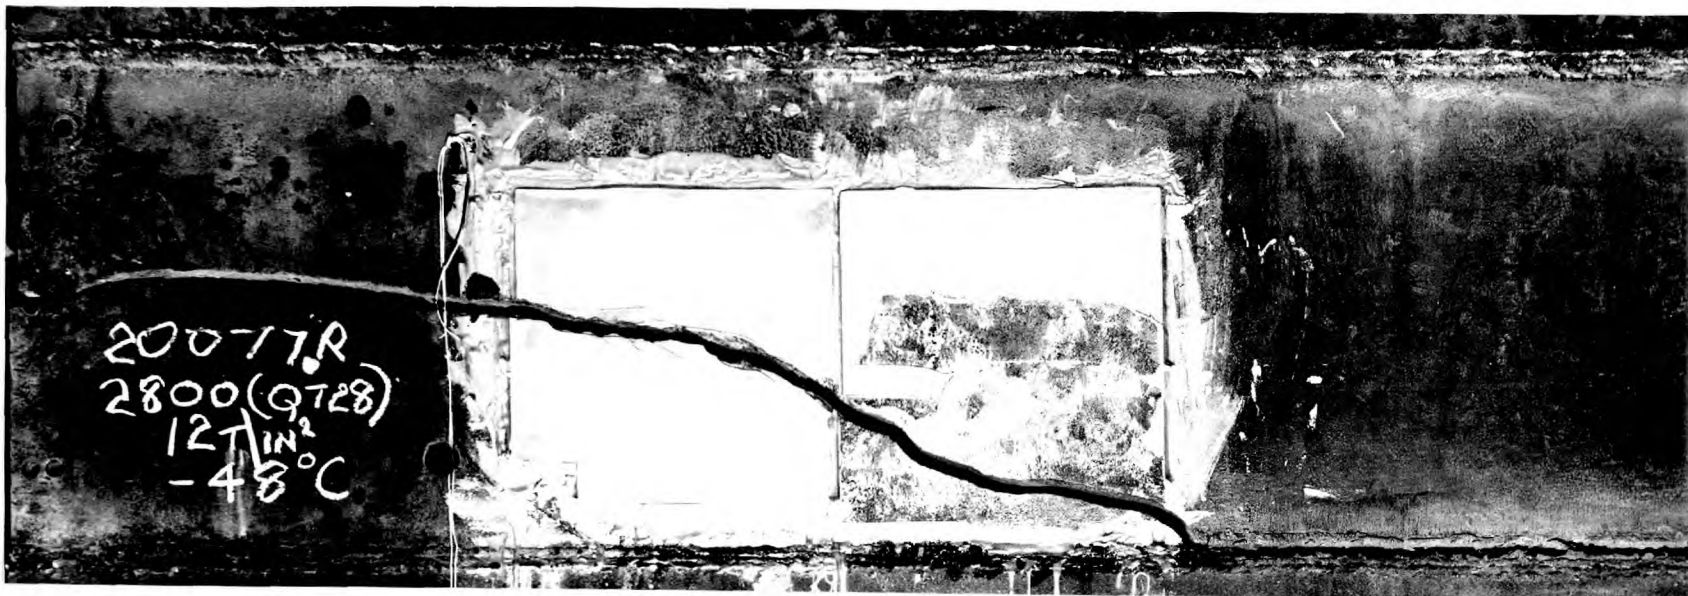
Fractured 6 foot wide specimen, crack ran along specimen-loading lug weld for the rest of the specimen length.
